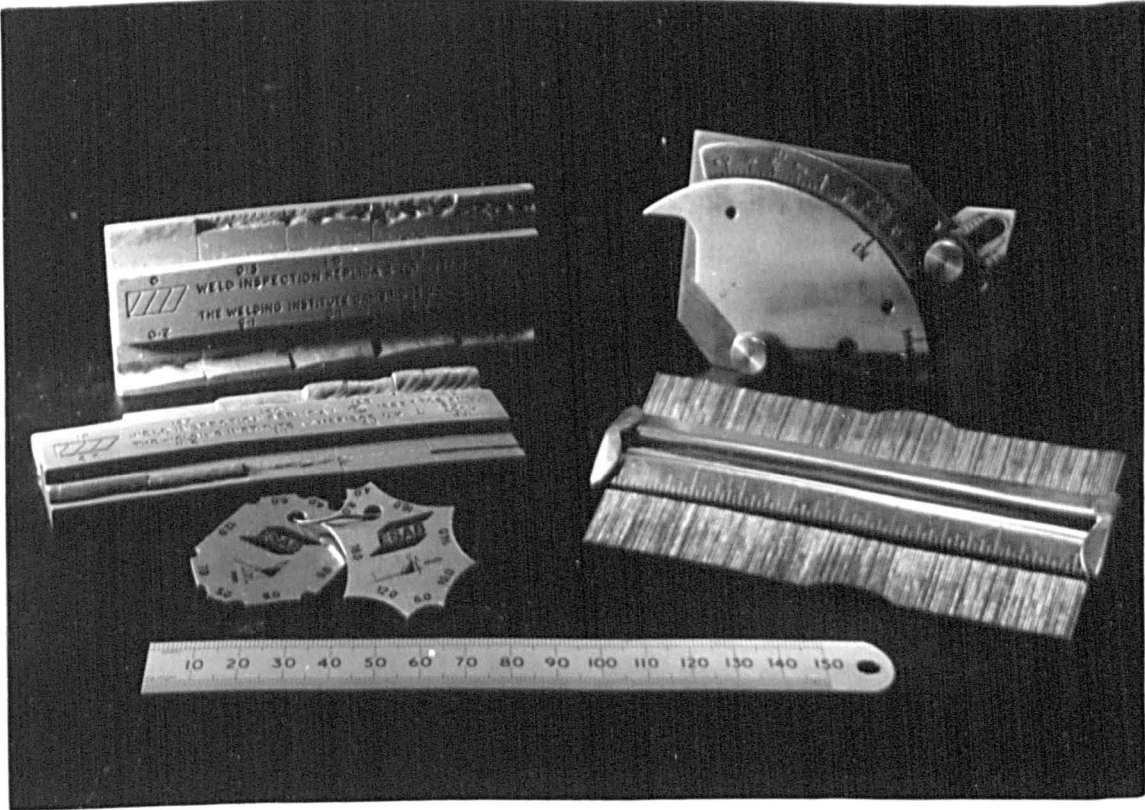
Weld gauges: Weld replicas (top left), Welding Institute gauge (top right), Fillet weld gauge (middle left), Six inch rule (bottom), Contour gauge (middle right)
